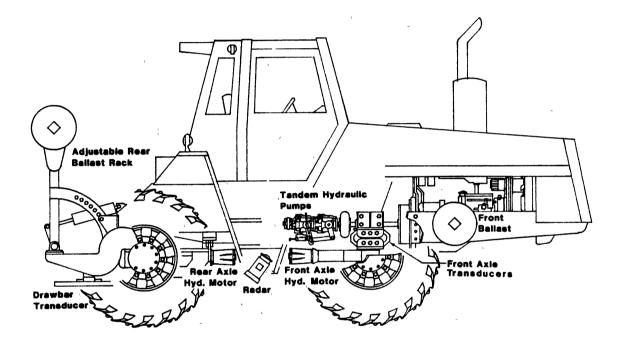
Detail Drawing of Four Wheel Drive Research Tractor Showing the Location of Major Components
